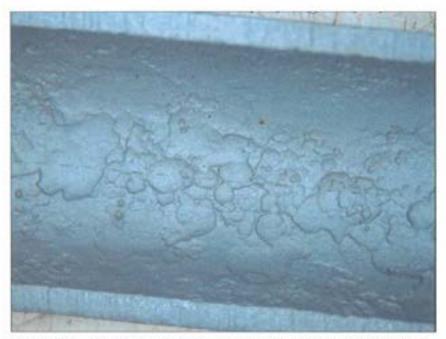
Corrosion damage on row 11 - tube 1 (top) after aluminum oxide blasting. Note "stitching" along fusion line of ERW joint.
